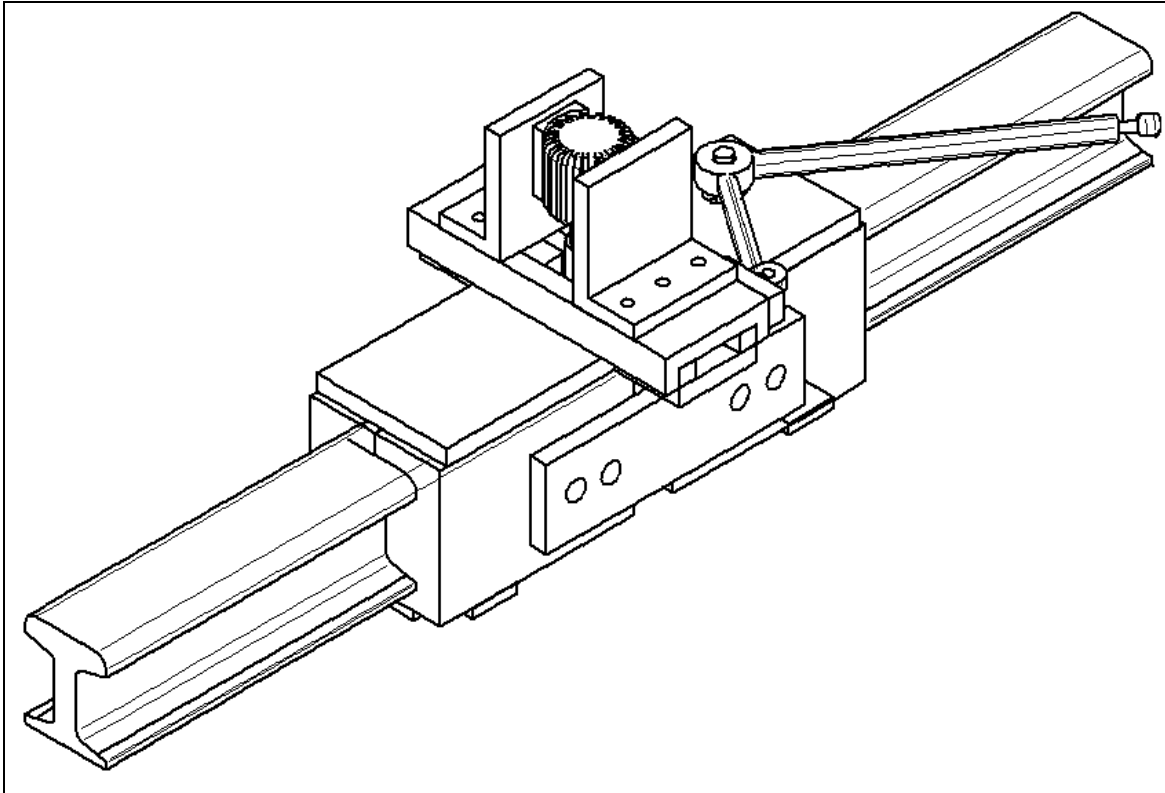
Friction stir welding machine applied in rail joining-concept 1
